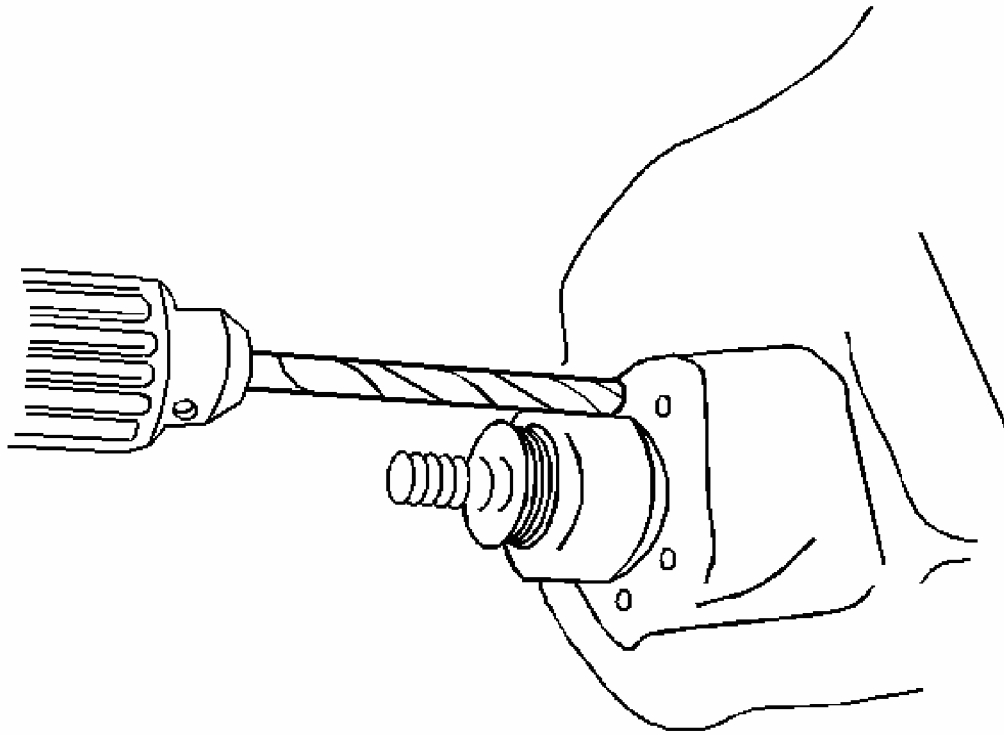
Drill A 1/4 in. Hole in Each Rivet
